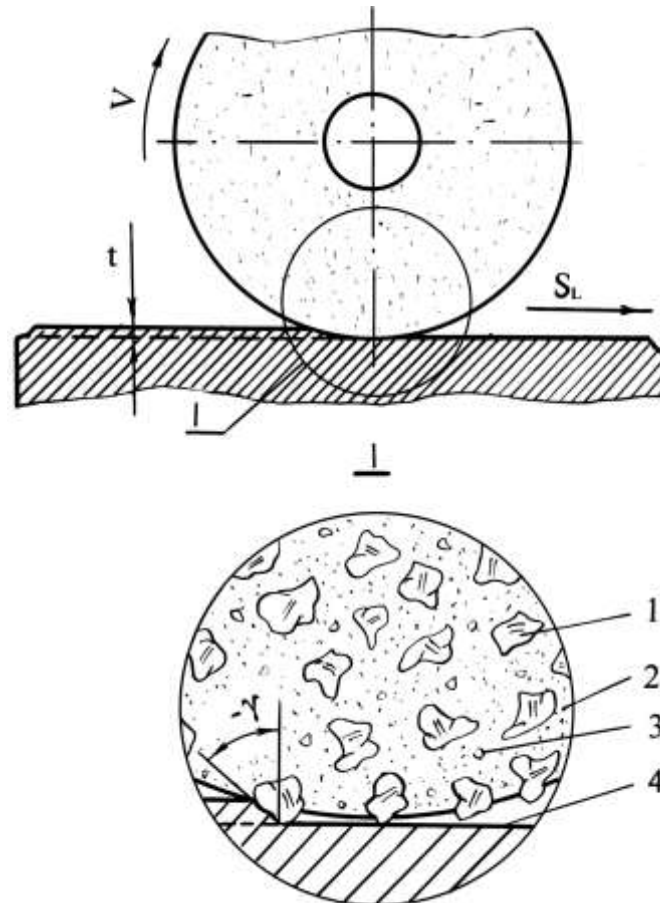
Cutting by grinding tool: 1 – abrasive grain; 2 – bond (matrix); 3 – pore; 4 – blank
